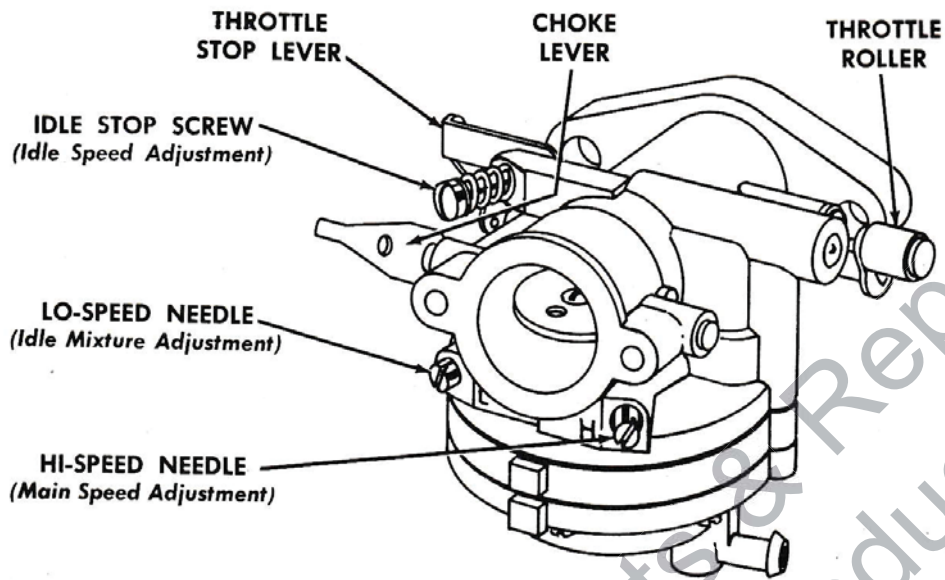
Carburetor Controls—Tillotson Model HL-27B
